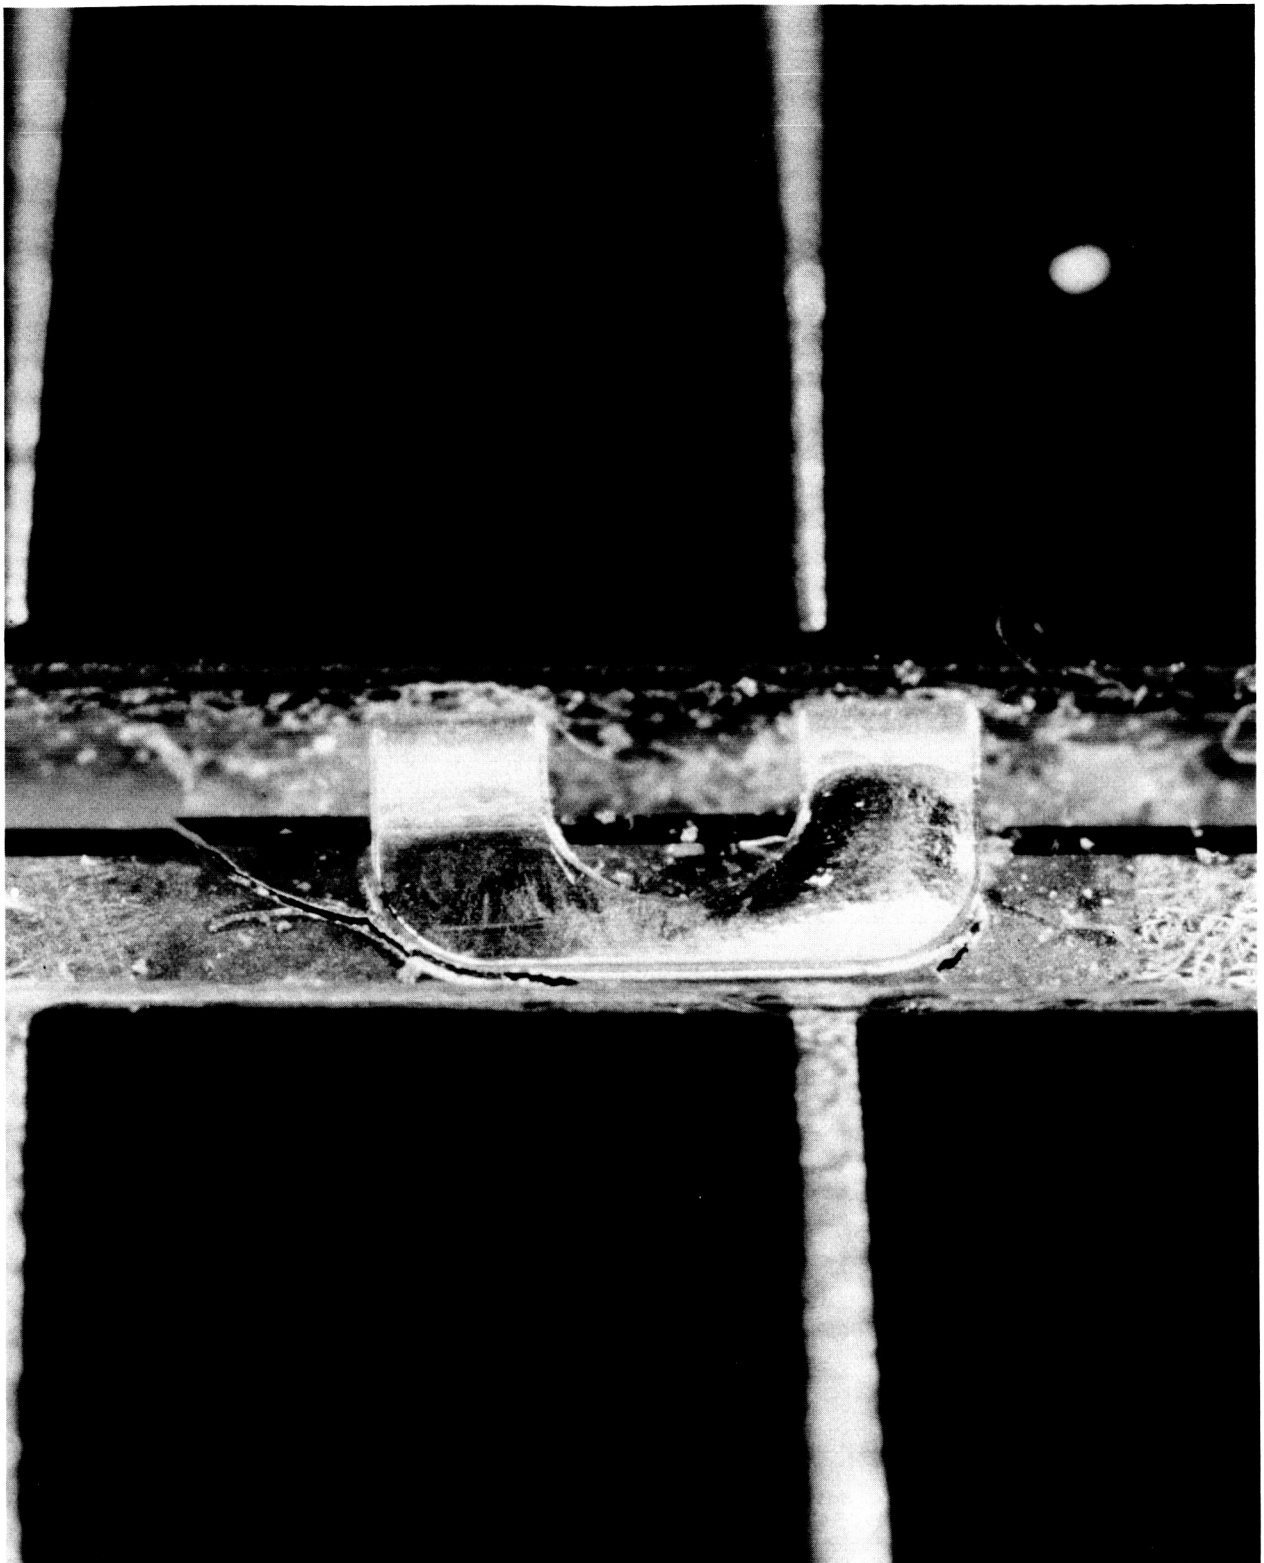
N-interconnector solder joint failure (configuration D1-12)
